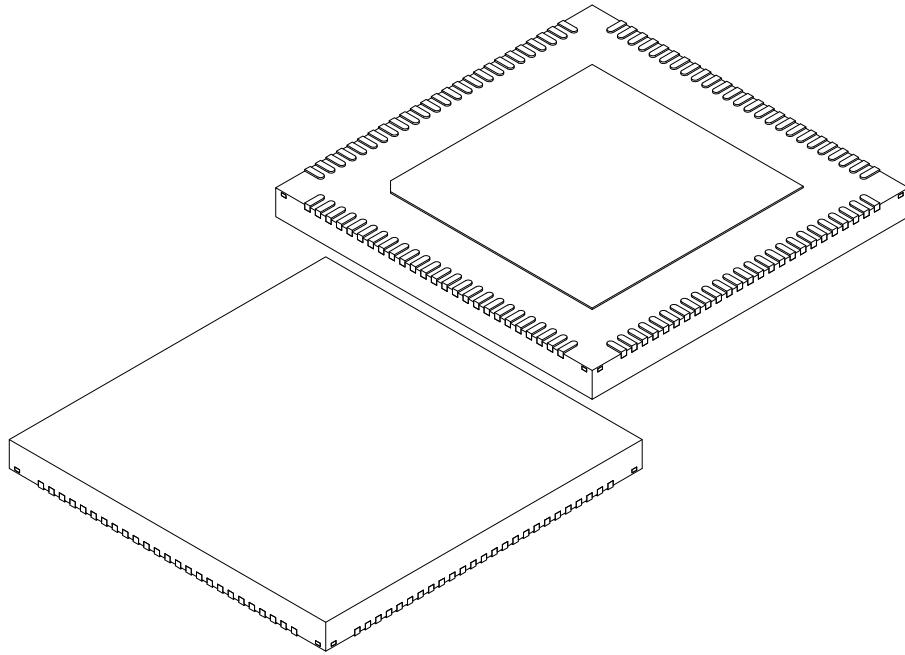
100-VQFN PACKAGE (DRAWING)
